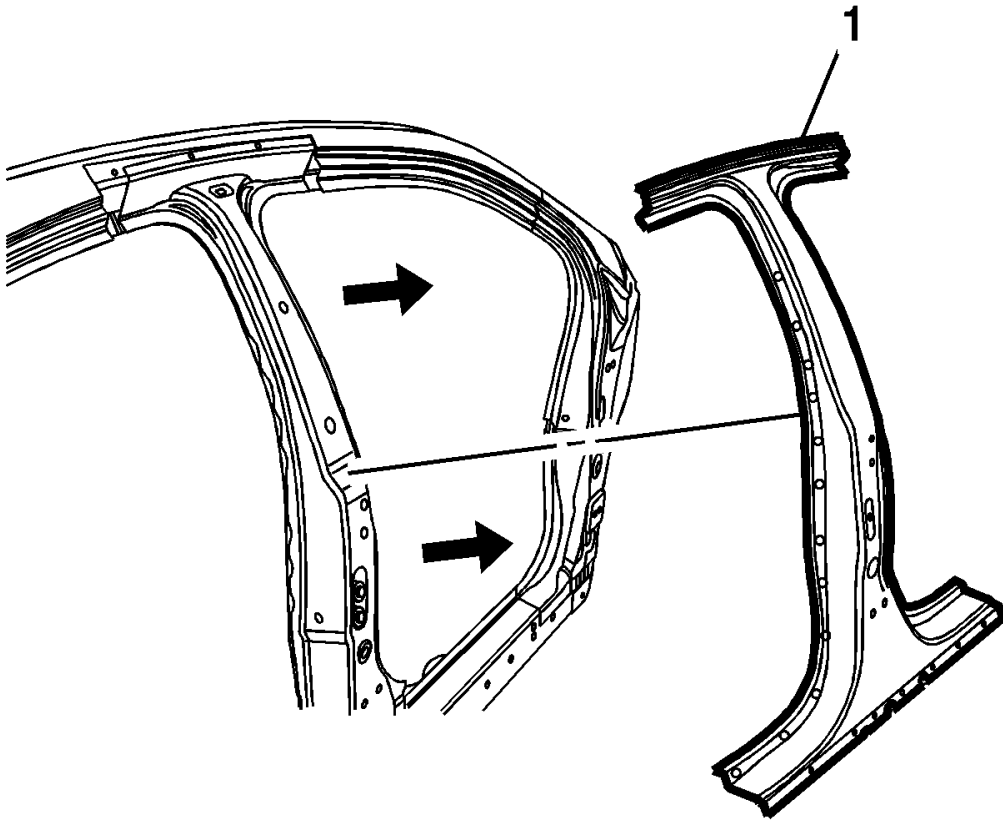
Removing Damaged Center Pillar Outer Panel Section
